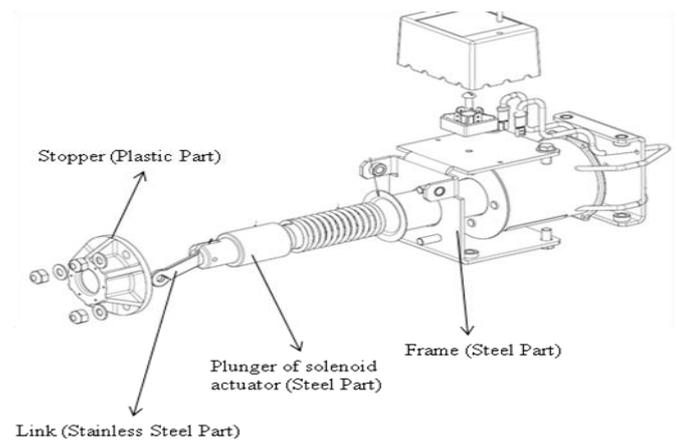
Exploded view of core stop assembly which is subjected to repeated loading of solenoid actuator
